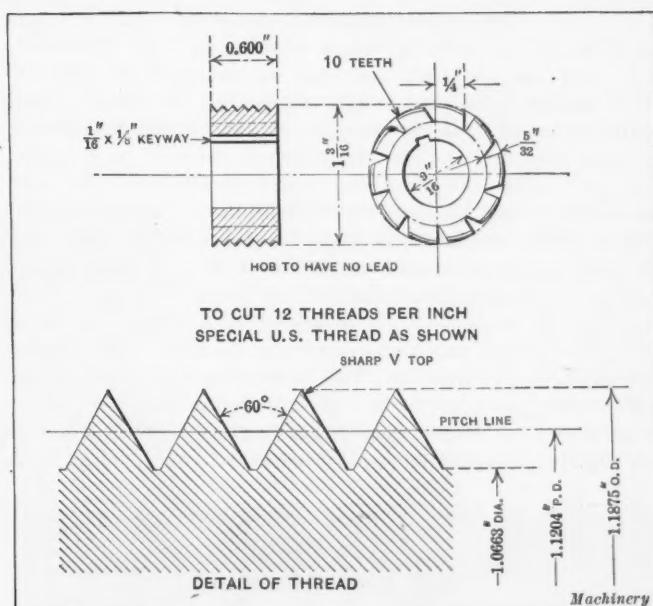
Detail of Milling Cutter or Hob for milling Threads for Fuse
